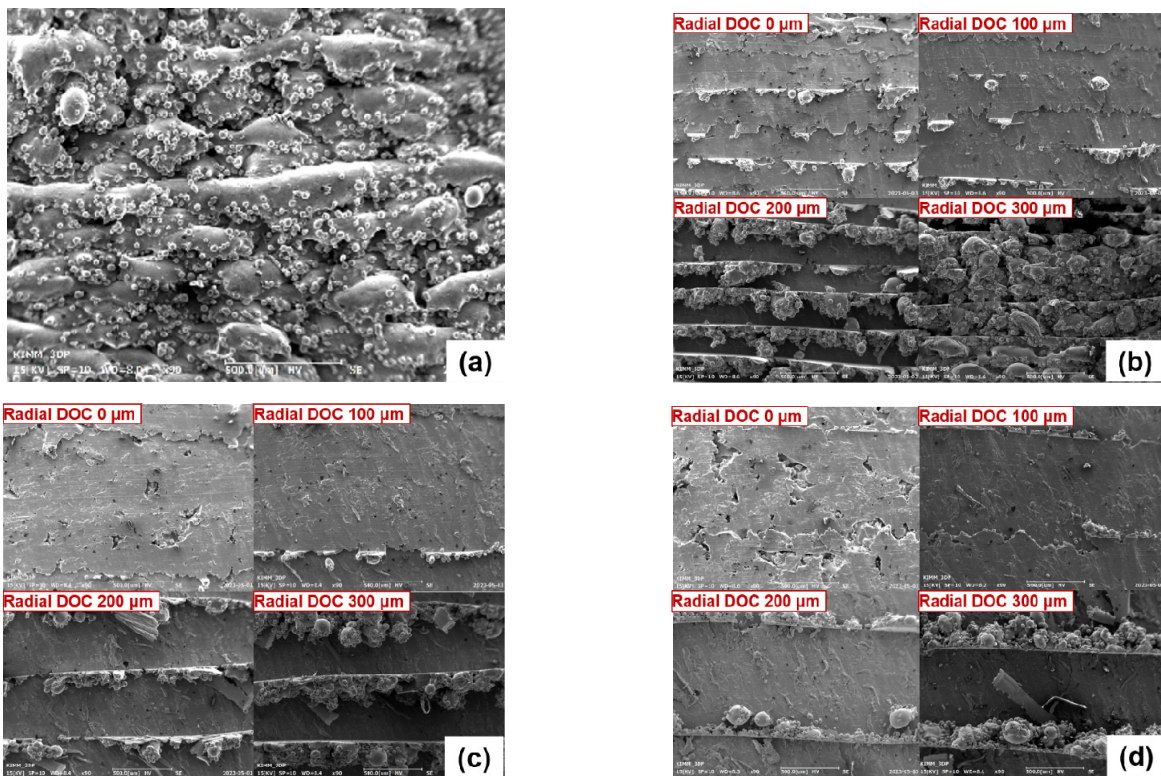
SEM images of L-hybrid PBF specimens (a) L-PBF surface without milling (b) Axial depth of cut 400 µm (c) Axial depth of cut 700 µm (d) Axial depth of cut 1000 µm
